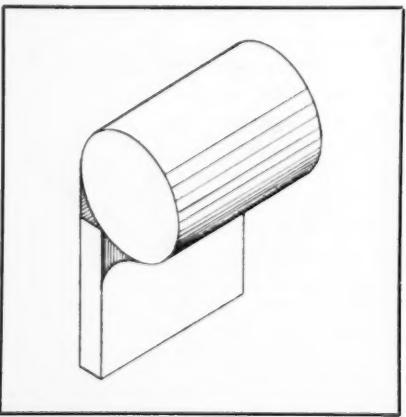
In this fabrication, the outside of the sheet is tangent to the rod. The resulting open wedge is filled in with welding material and the lower side is also welded.
